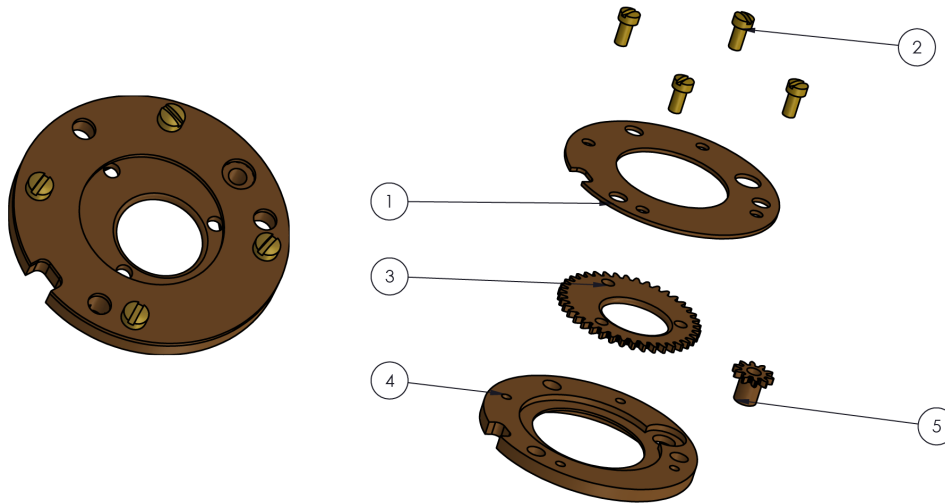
Drawing of the gear assembly. (1) is the top gear cover plate; (2) is the brass screw that holds the top gear cover plate to the gear cartridge (0-80 x .125”); (3) is the central ring gear that contains the aperture; (4) is the containing gear cartridge; (5) is the drive gear that interfaces between the control rod and the central ring gear.
